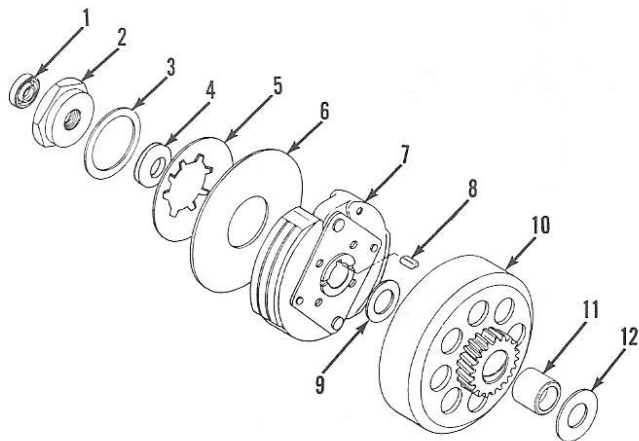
Exploded view of centrifugal clutch used on both models.
